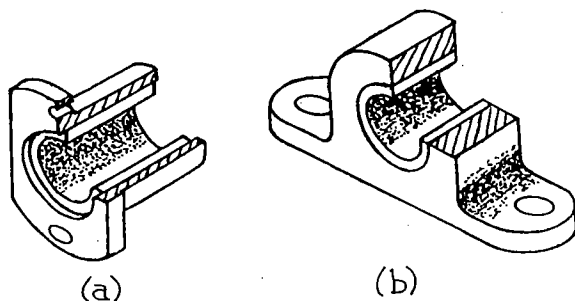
(a) A bearing housing; (b) bearing mounted in a pillow block.
